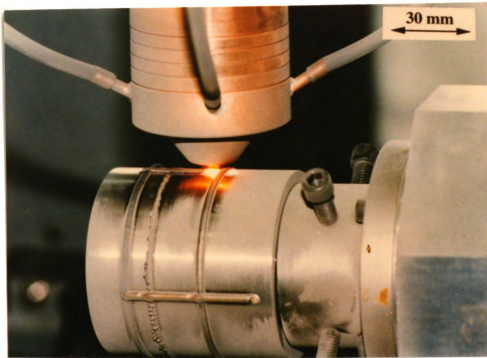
A view of intersecting hard-facing cladding tracks directly deposited on a steel roller.
